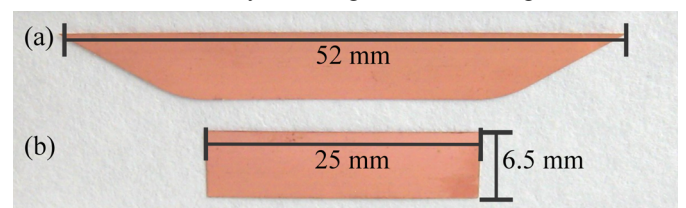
Roebel cable offcut piece. (a) Before trimming and (b) after trimming.
